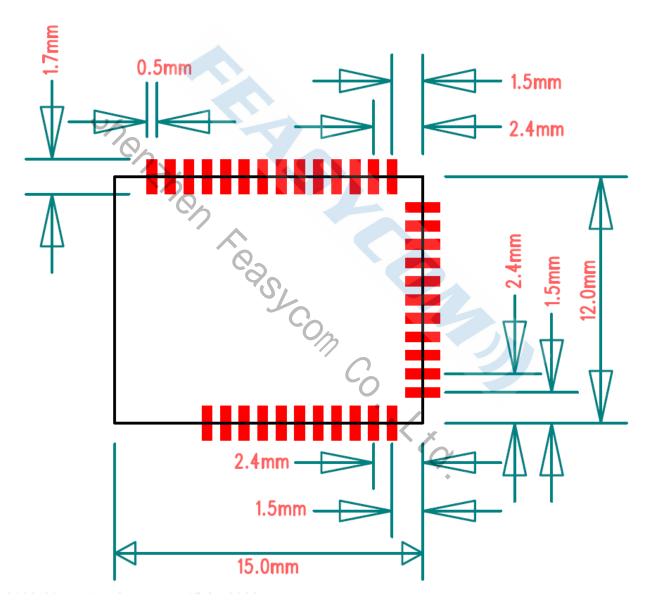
FSC-BT6038A footprint Layout Guide (Top View)
